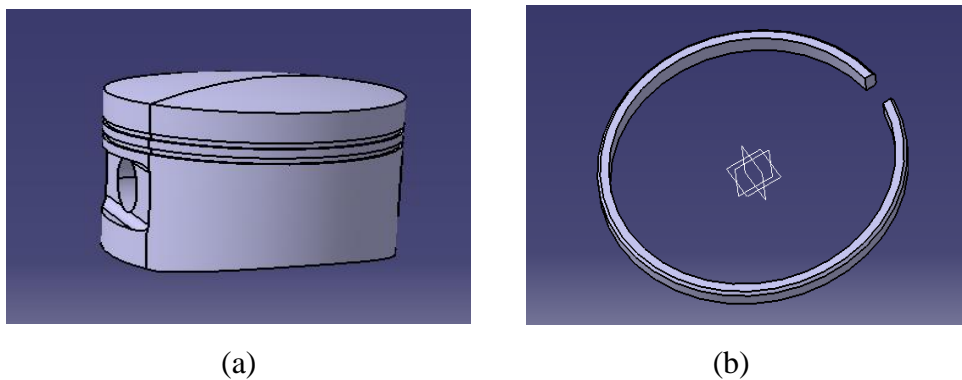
CATIA image of (a) Piston (b) Piston ring
